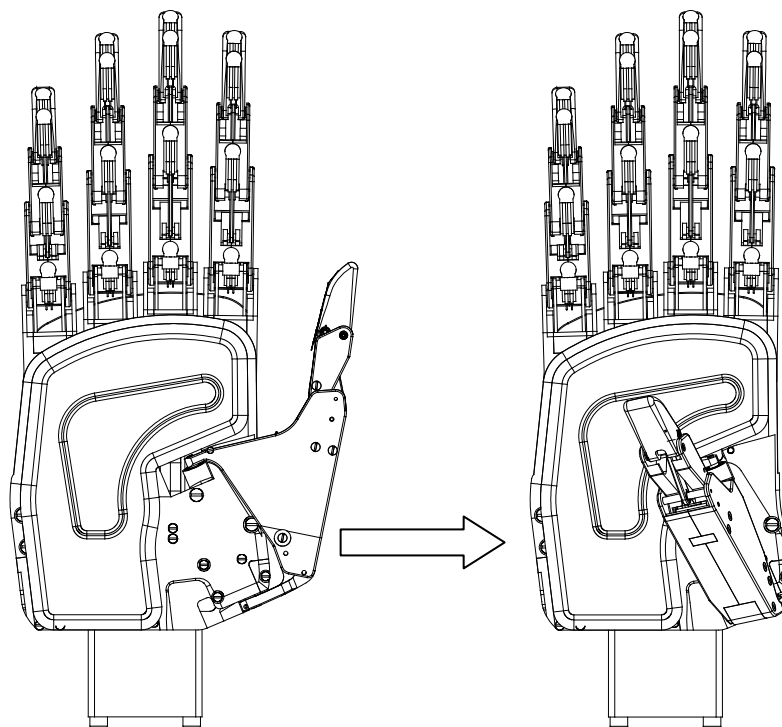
Thumb rotation in the Canterbury Hand CAD Assembly
